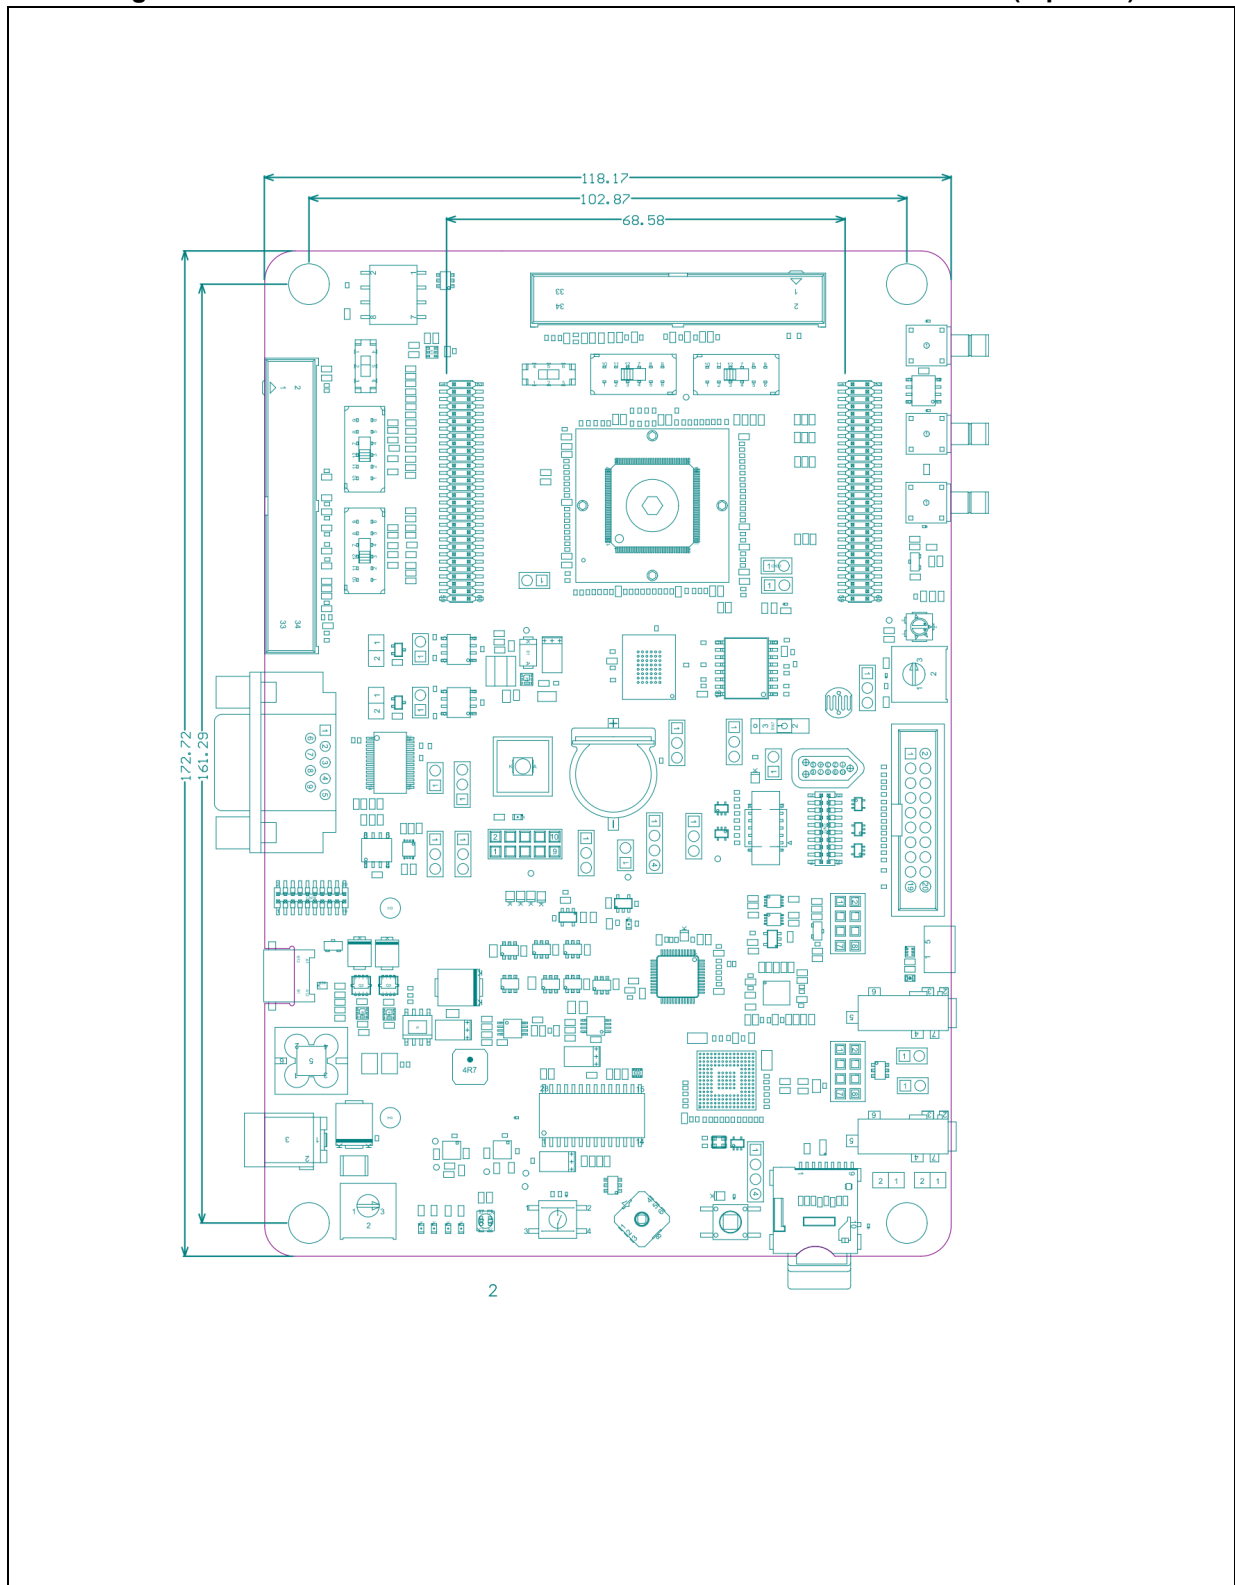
provides the mechanical dimensions of the STM32G474E-EVAL board.
